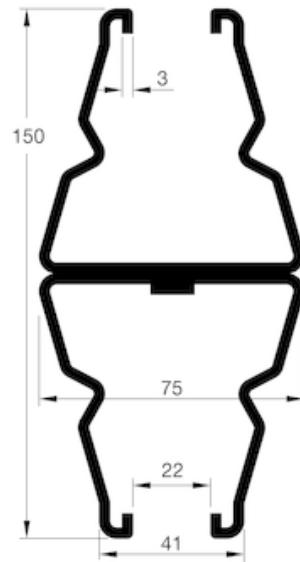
Channels MS 41/41/2,0 D; MS A4 41/41/2,0 D; MS HCP 41/41/2,0 D;
